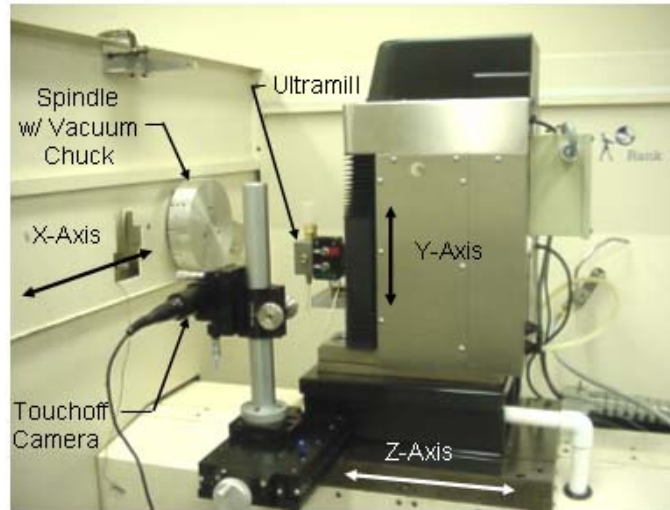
Ultramill installed on Nanoform 3-axis diamond turning machine (DTM). Y-axis camera for plan view of workpiece surface is not installed in this in picture.
